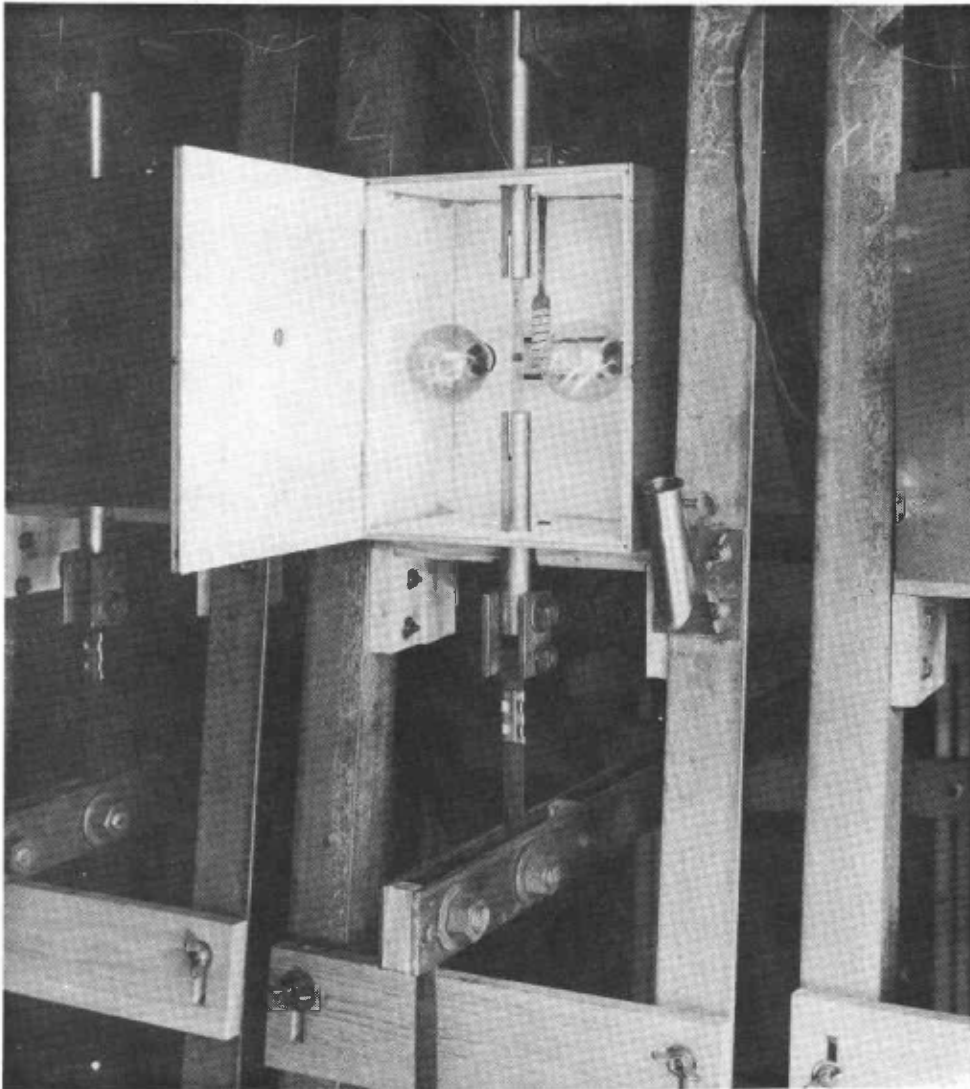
Arrangement of test specimen, test fixture, and thermostatically controlled heating chamber in the test apparatus for determining the long-time strength of adhesive bonds in aluminum lap-joint specimens.
